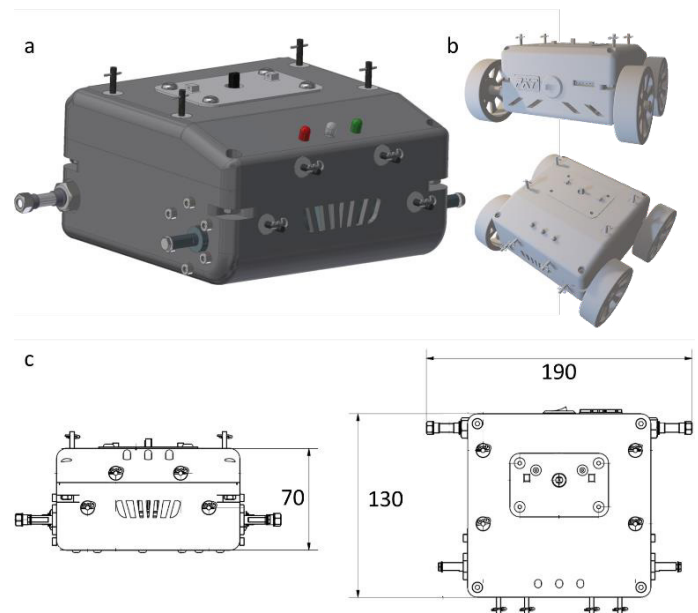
(a) Design Education Platform (DEP) (b) Drivable DEP with attached wheels (c) Size of technical drawing.
